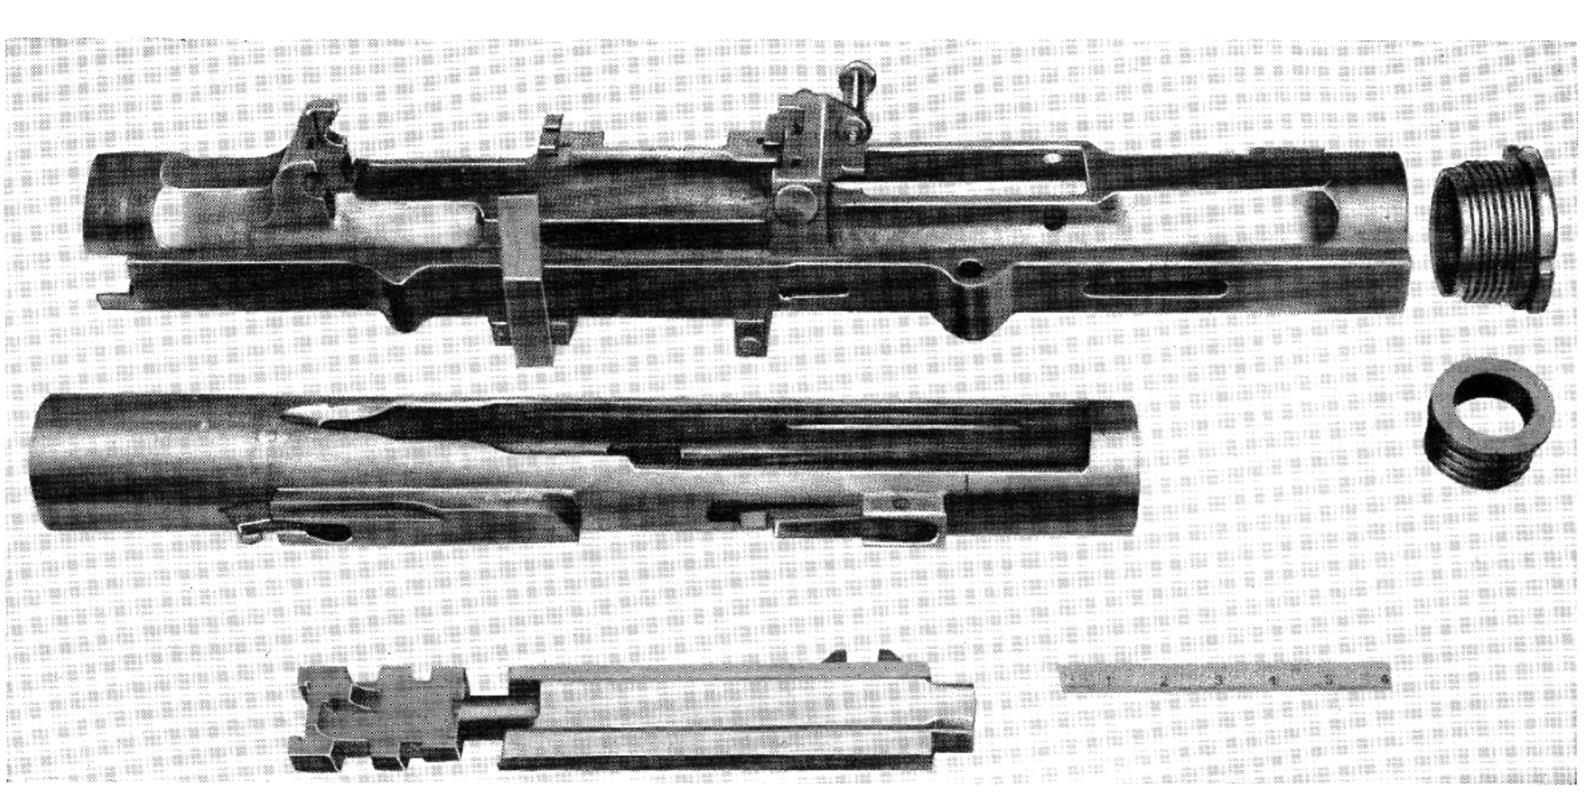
Receiver, buffer, barrel extension and bolt for 23-mm NS Gun.
